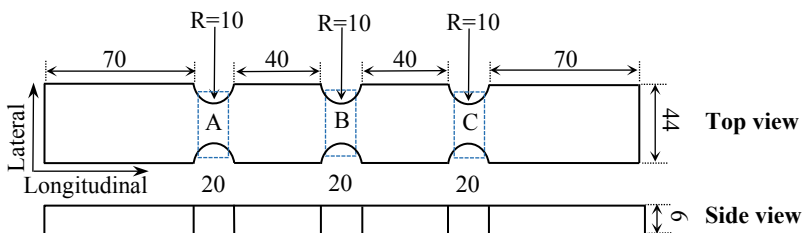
Geometry of notched steel specimen (all dimensions are in mm)
